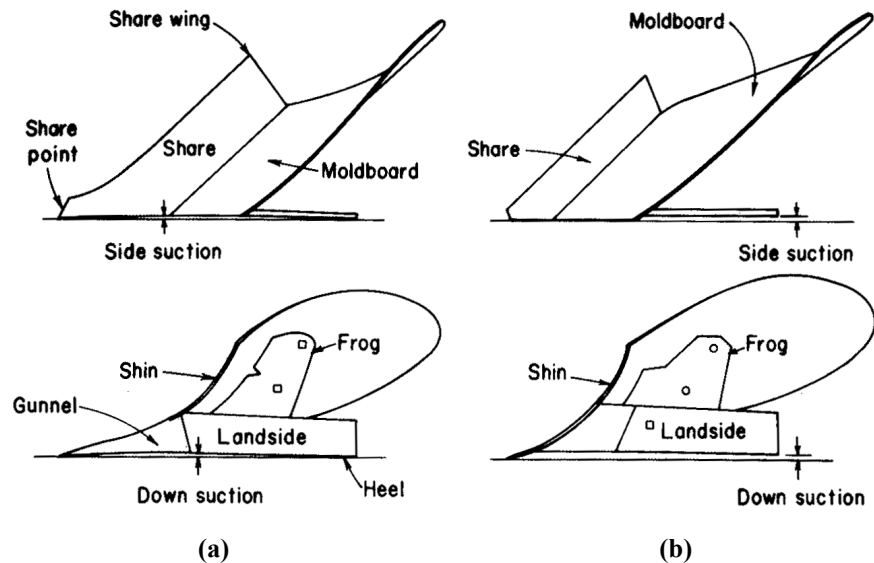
Typical moldboard plow bottoms, (a) with gunnel-type share, showing method of measuring suction when no rear furrow wheel or depth control devices are used, (b) with throw-away share, indicating clearances when a rear furrow wheel is used (reprinted from Kepner et al., 1978).
